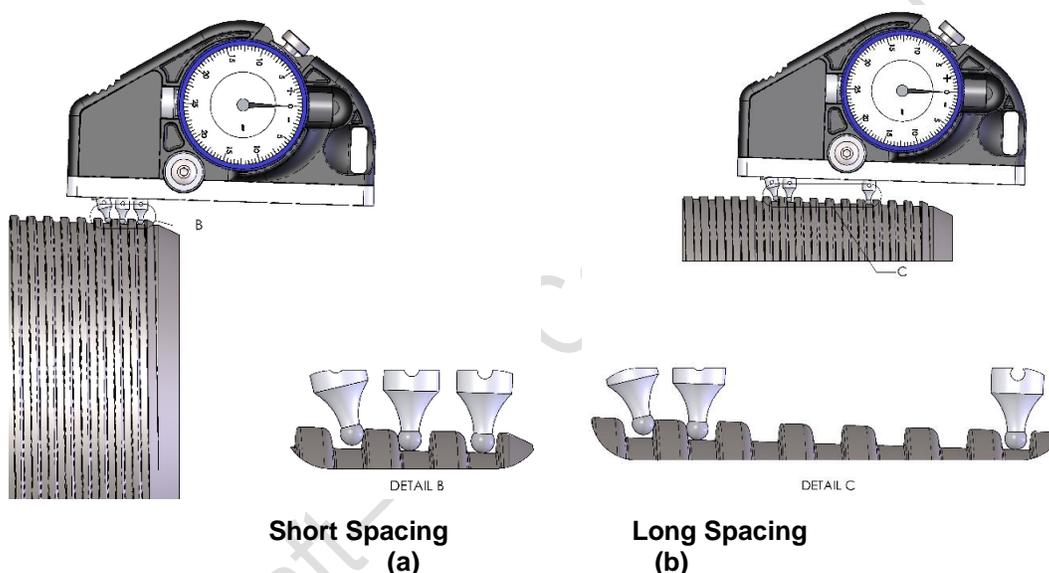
Example Tooth Thickness Measurement on Product—Short and Long Spaced
